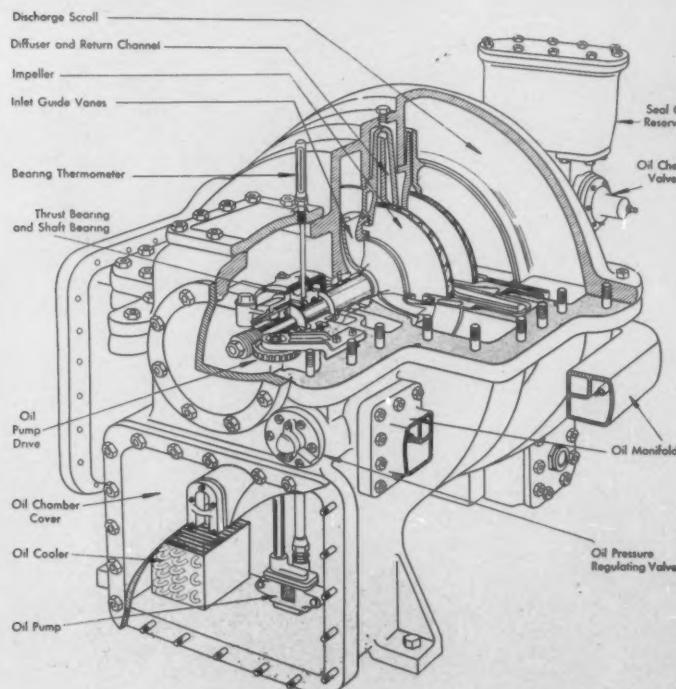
Oiling circuit for Carrier centrifugal refrigerating compressor. Only four parts have wearing surfaces: shaft bearing, thrust bearing, oil pump, and shaft seal. Note oil pump submerged in reservoir and oil cooler to control oil temperature.
